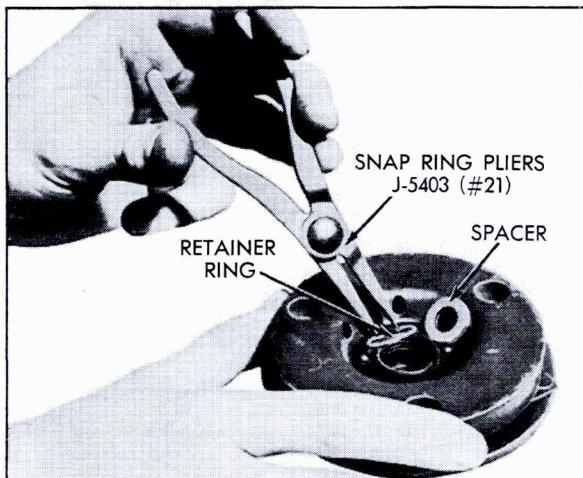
Removing Hub Retainer Ring and Spacer
